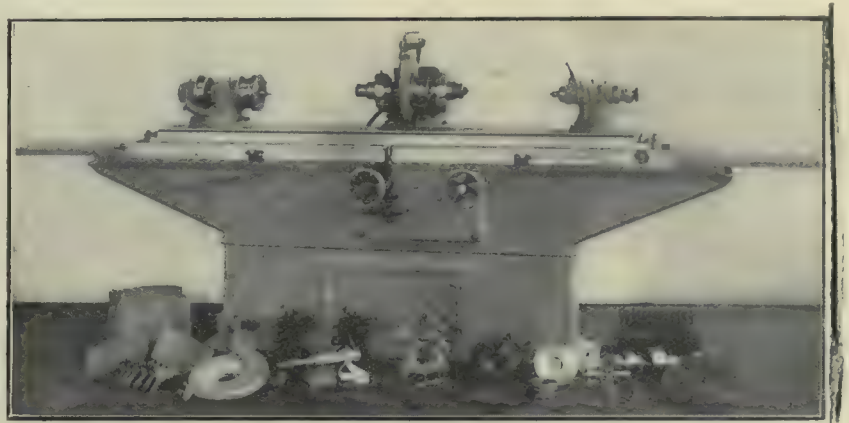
No. 4 B. & S. Universal Grinding Machine, Showing Attachments.
